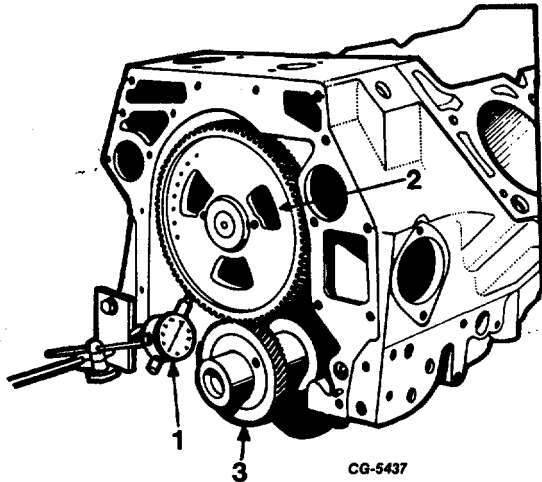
Checking Camshaft and Crankshaft Gear Backlash
